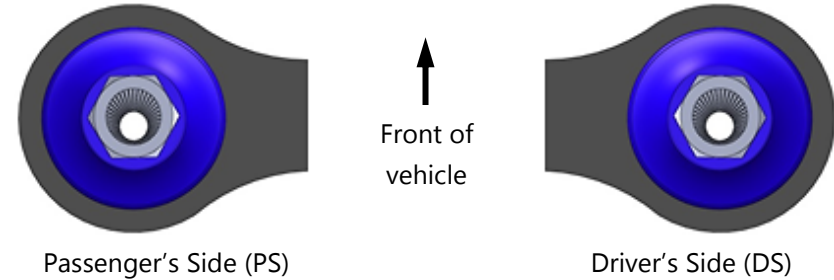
SuperPro Polyurethane Bushes and Crush Tube
